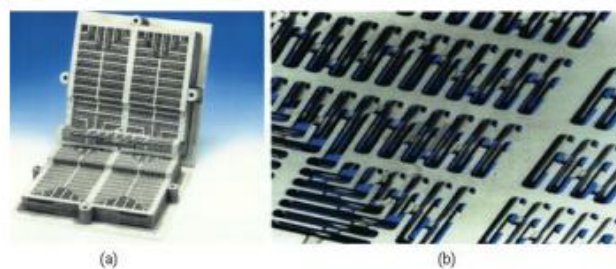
Marbond heat exchanger, (a) Exploded view, (b) layers of slotted plates forming flow paths [3].
